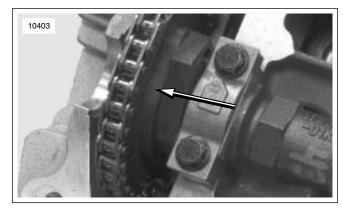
Spacer Boss on Inside (rear cylinder cam sprocket)
